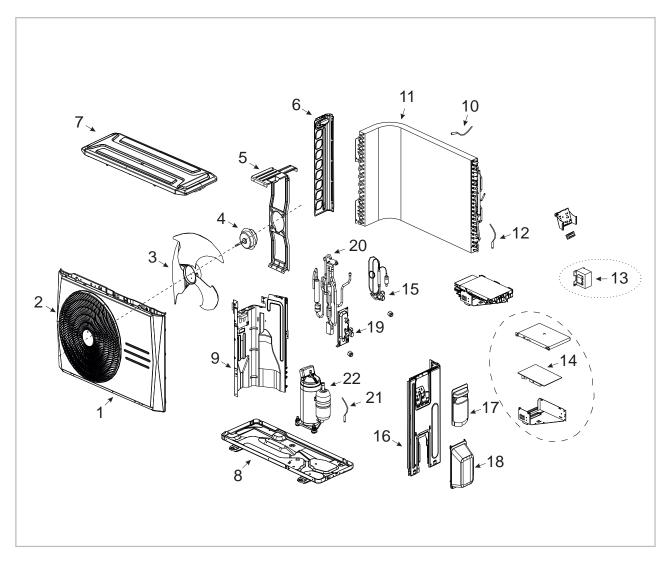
Exploded view of the outdoor units ML 265 DC-685 DC AT
